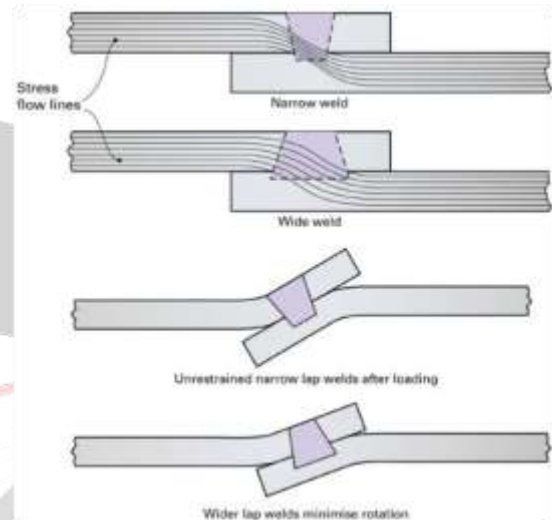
Comparative stress flow lines :a)Narrow weld, b)Wide weld, c)Unrestrained narrow lap welds after loading, d)Wider lap welds minimize rotation [28]
